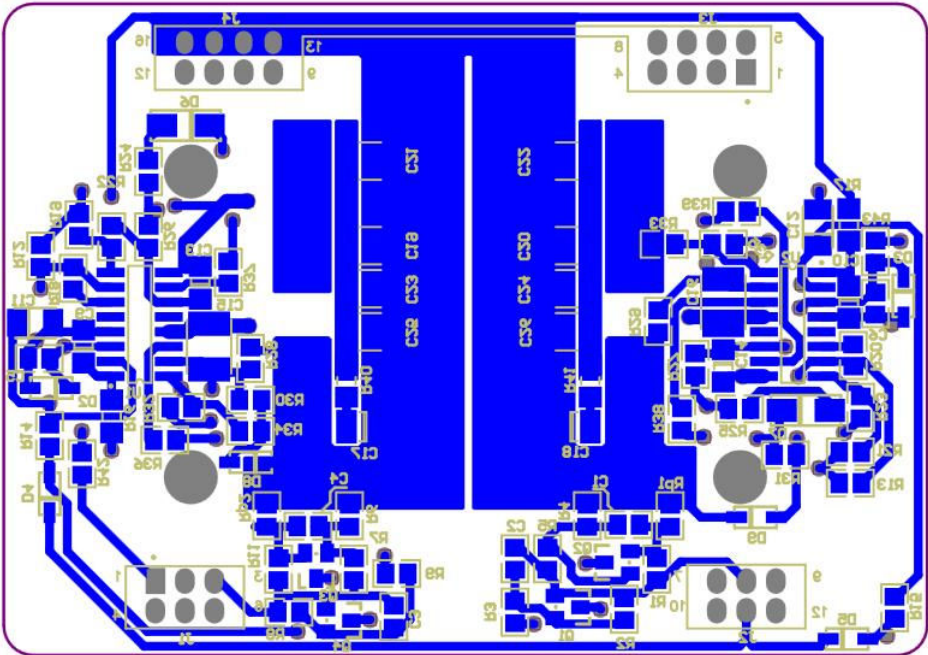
IRAUDAMP6 Daughter board PCB Bottom Layer (Top View)
